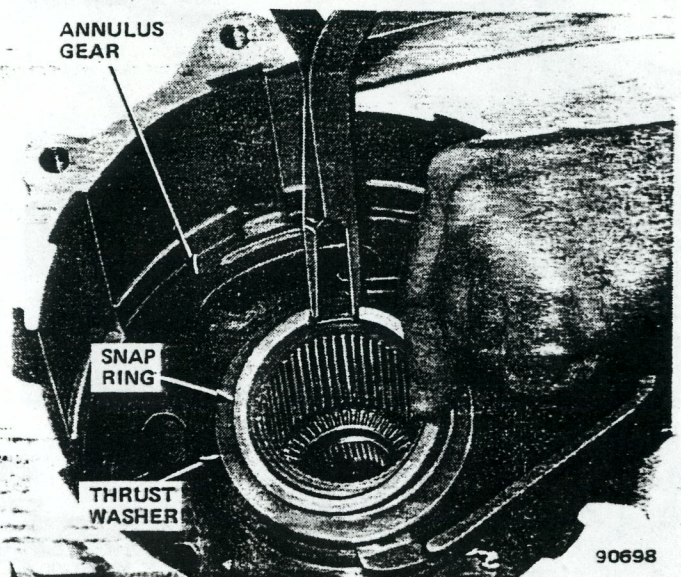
D-58 Annulus Gear Snap Ring and Thrust Washer Removal/Installation
